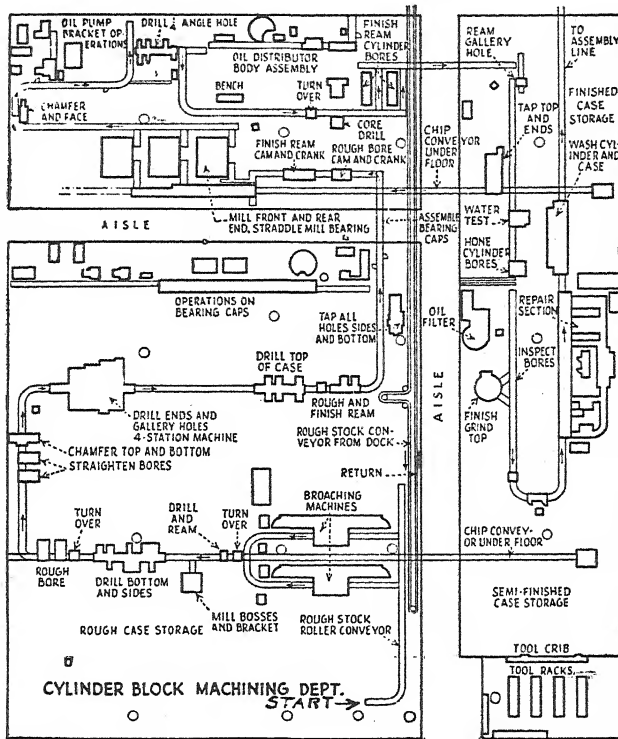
Preliminary Plant Layout Using Card Forms Cut to Scale to Represent Machines.
